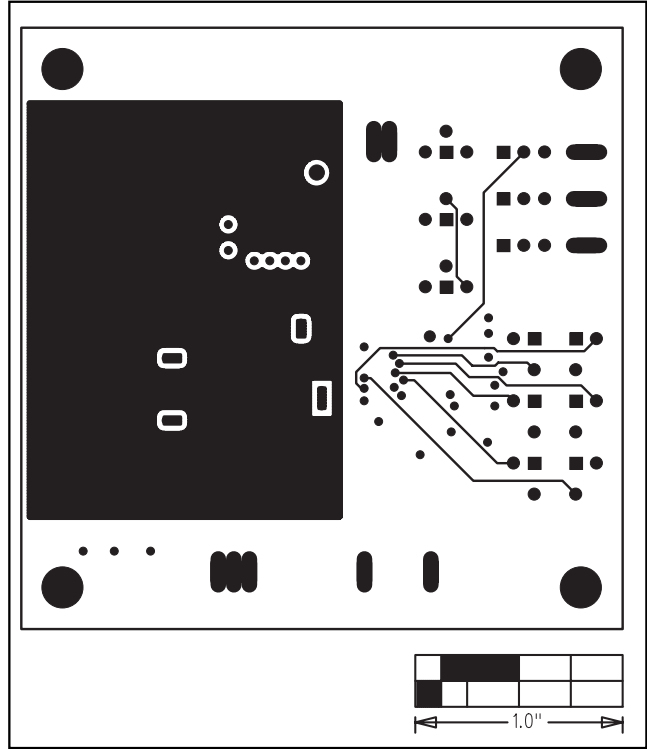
MAX8720 EV Kit PC Board Layout—Internal GND/Signal Layer
